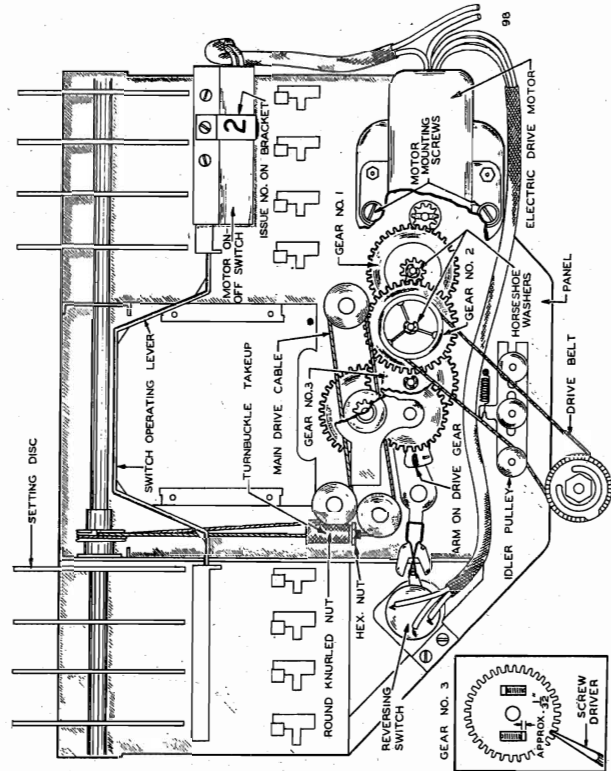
Rear View of Electric Drive Panel Showing Gear Assembly
